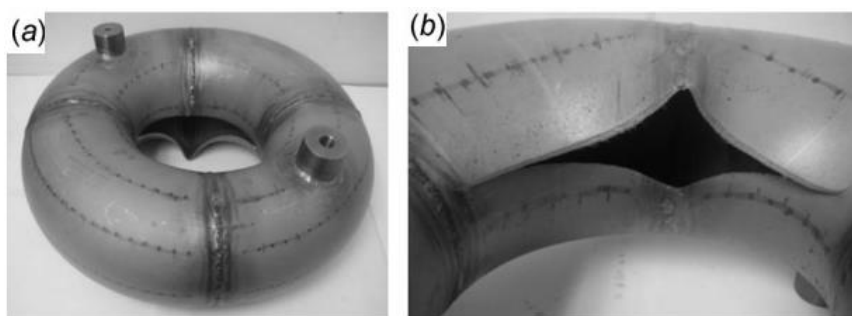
(a) Burst shape, and (b) burst position of a toroid assembled from four butt-welded 90 deg elbows (Vu & Błachut, 2009).
